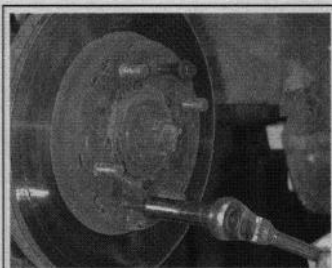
Tighten the bolts until they force the rotor off of the hub . . .
